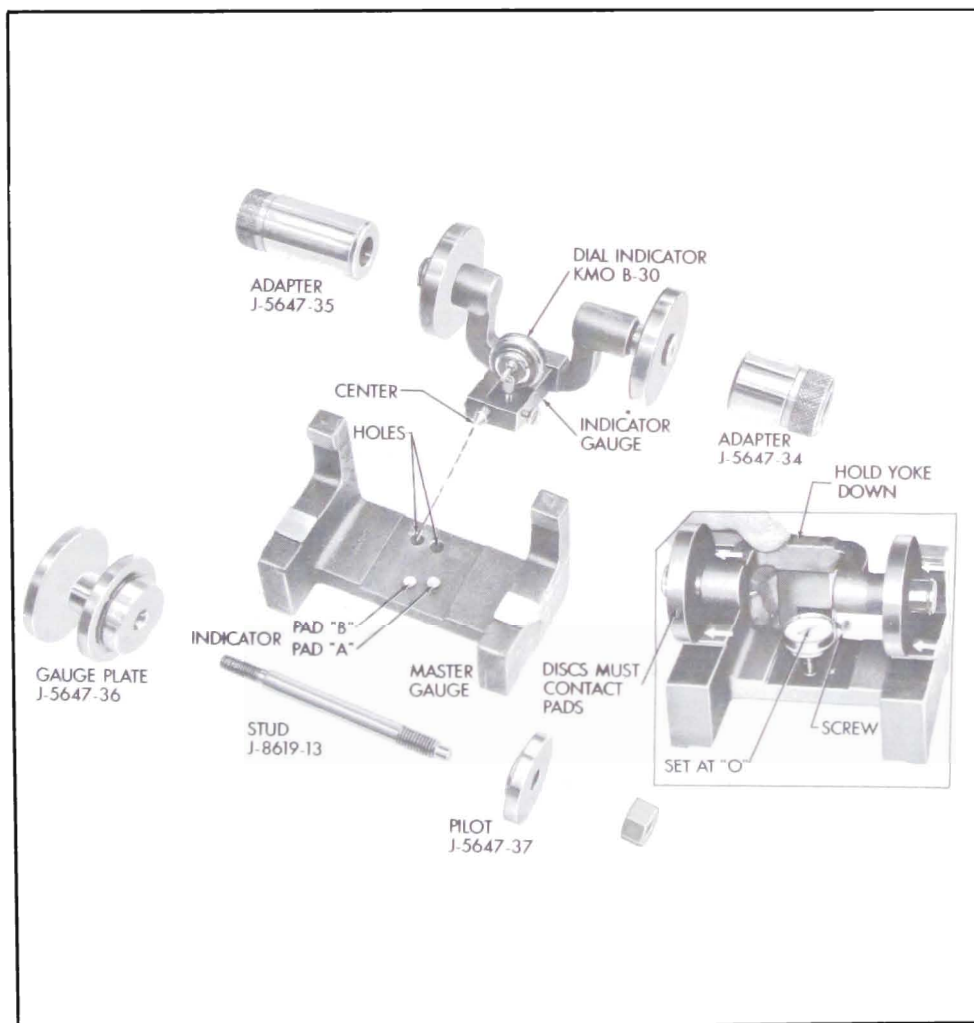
Pinion Setting Gauge J-5647 and Adapters
